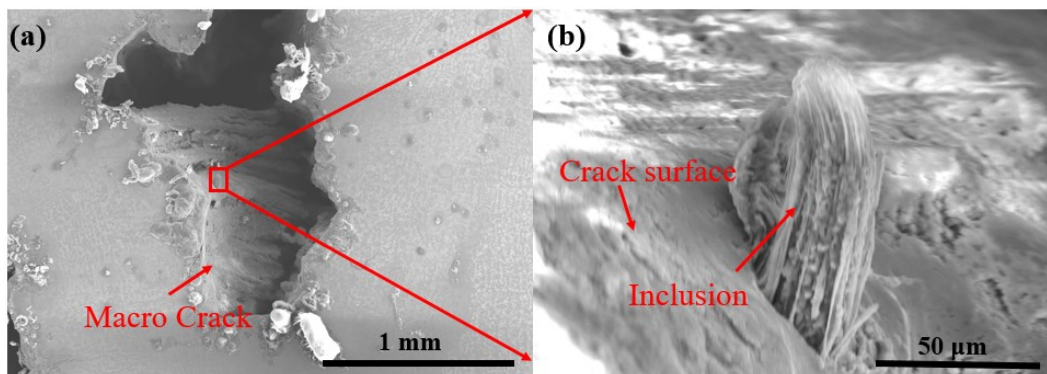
Cracked sample: (a) macro crack and (b) inclusions on the crack surface.
